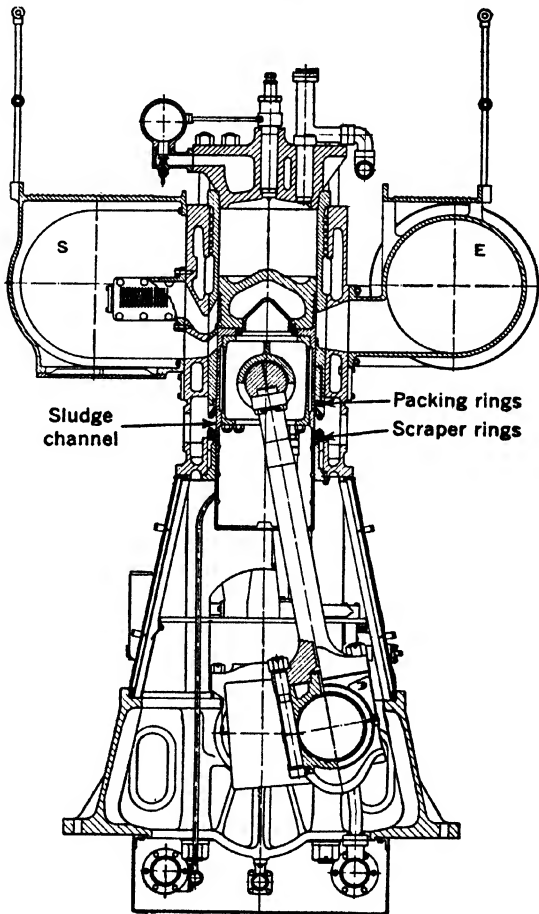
Section through cylinder of Busch-Sulzer two-stroke cycle solid-injection Diesel engine.
